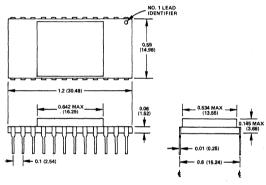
Outline Dimensions (Dimensions shown in inches and (mm))
